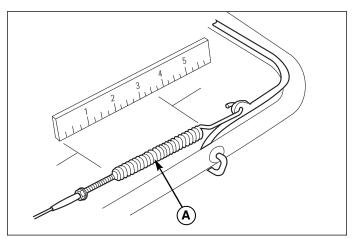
Auger Cable Adjustment - Engaged A. Cable Spring
